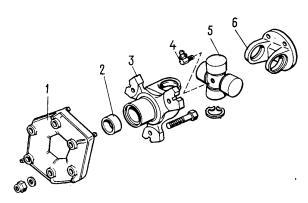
Parts of Intermediate Propeller Shaft: 1 - flexible coupling; 2 - aligning bushing; 3 - flexible coupling flange; 4 - grease fitting; 5 - cross assembly; 6 - universal joint flangeyoke
